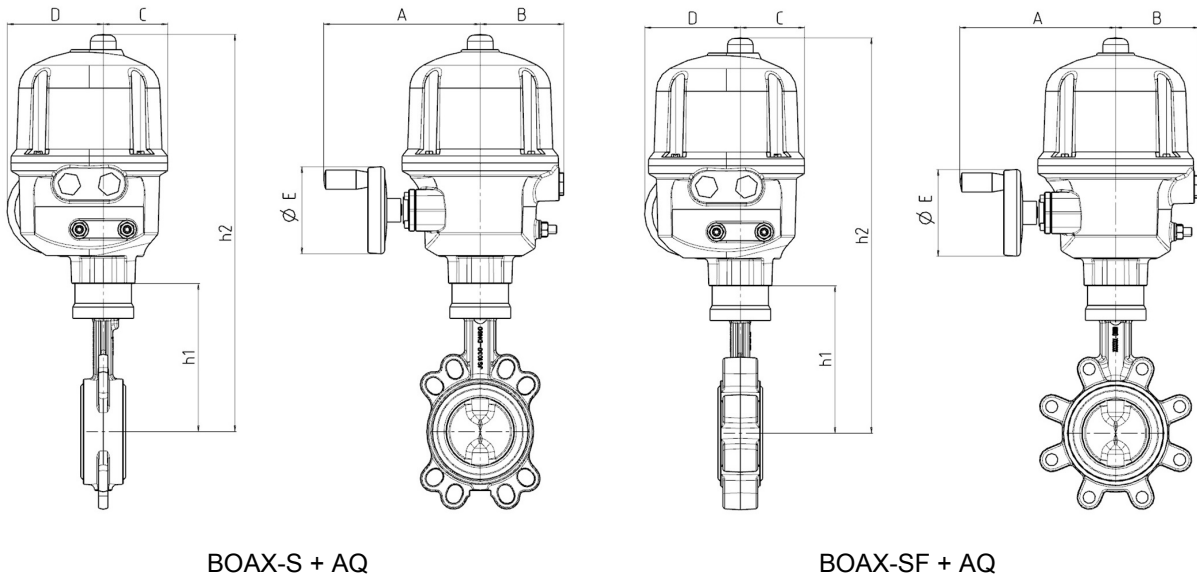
Sectional drawings of BOAX-S/SF with AQ
